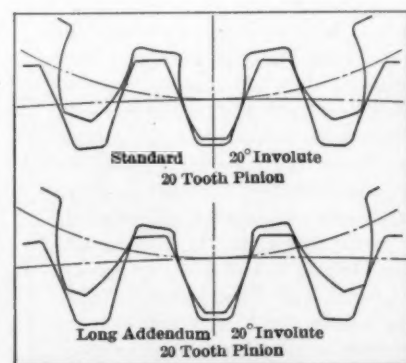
Comparing standard and long addendum 20° involute 20-tooth pinions
